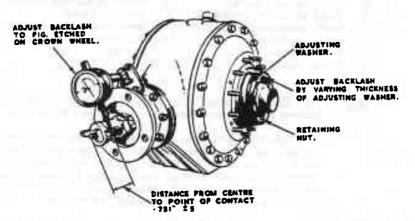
CHECKING PINION AND CROWN WHEEL BACKLASH.
